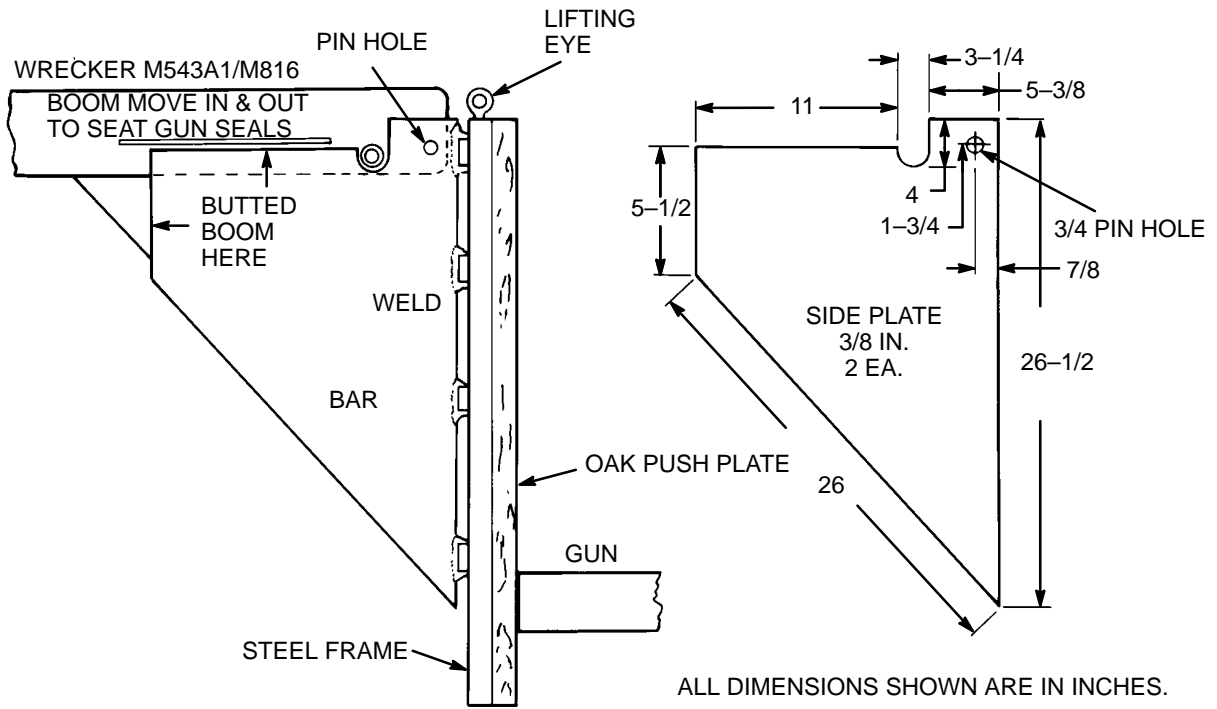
Dimensional Drawing for Fabricating Improved Recoil Mechanism Exercising Bracket (M543A2/M816 Wrecker)
